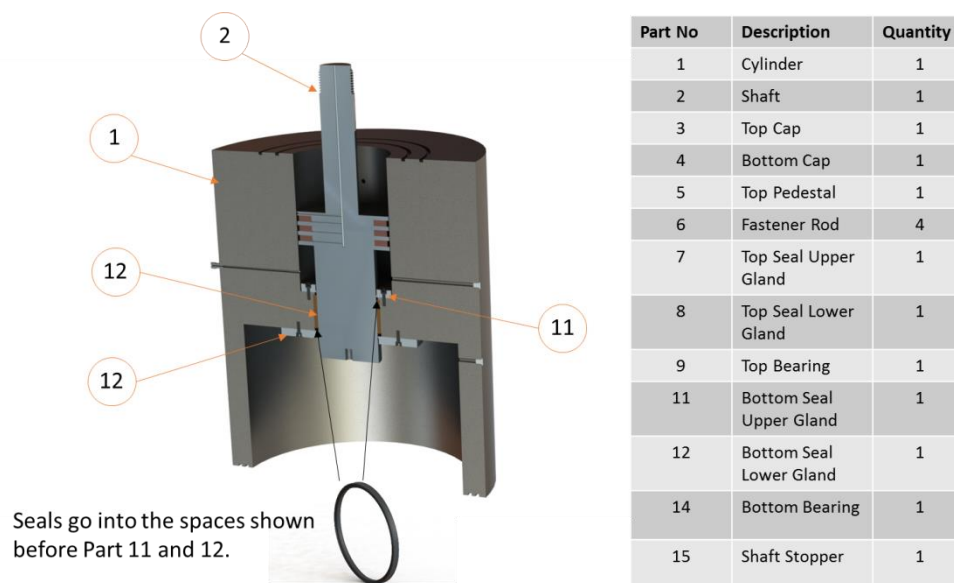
Step 1: Insert the shaft into the cylinder bore (the bottom bearing, seals, bottom seal lower and upper glands were installed on the cylinder).
